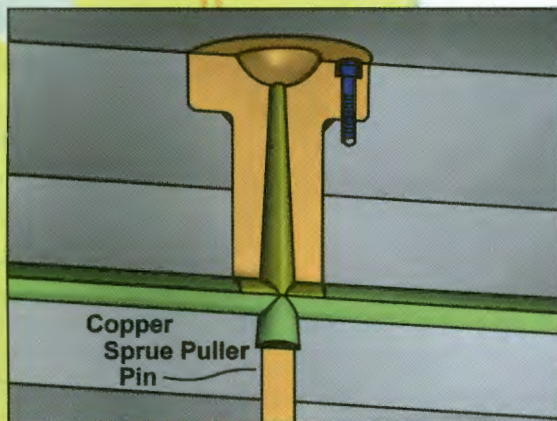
Illustration E: Copper alloy sprue puller pin used to firm up puller and reduce molding cycles.
